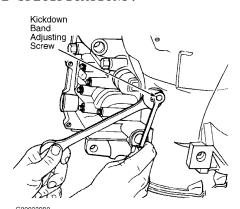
Locating Kickdown Band Adjusting Screw & Lock Nut (31TH Transaxle)
